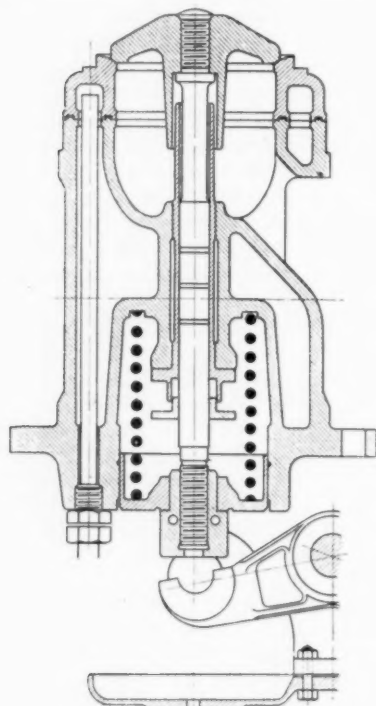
EXHAUST VALVE OF BRITISH 1300-HP. GAS-DRIVEN BLOWING ENGINE
